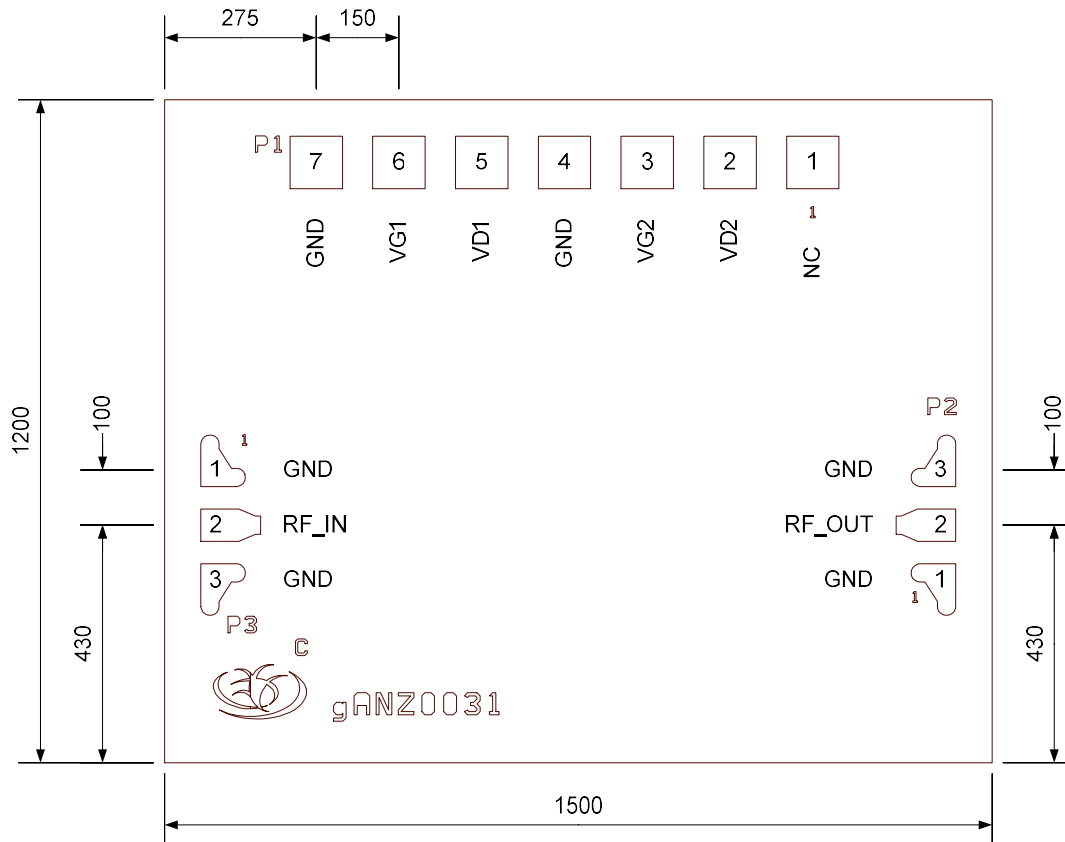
Outline drawing of the MMIC. Dimensions are in μm .
